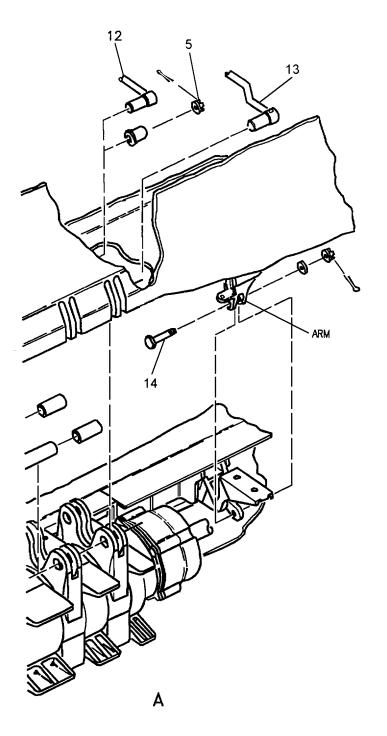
Outer Wing Removal and Installation (Sheet 3)
